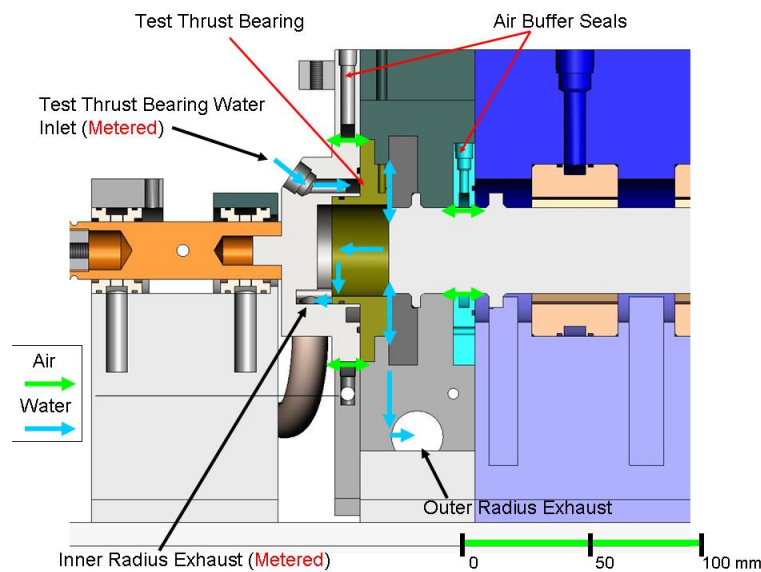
Test thrust bearing and test thrust bearing air seal flow paths
